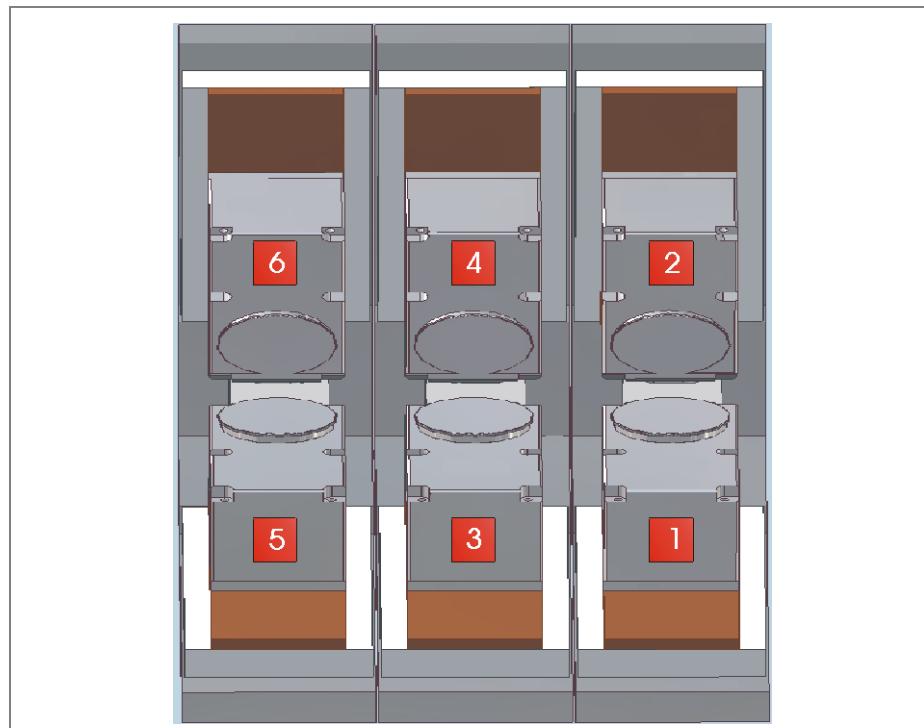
Arrangement of the laser stacks in the VG4L supply unit
